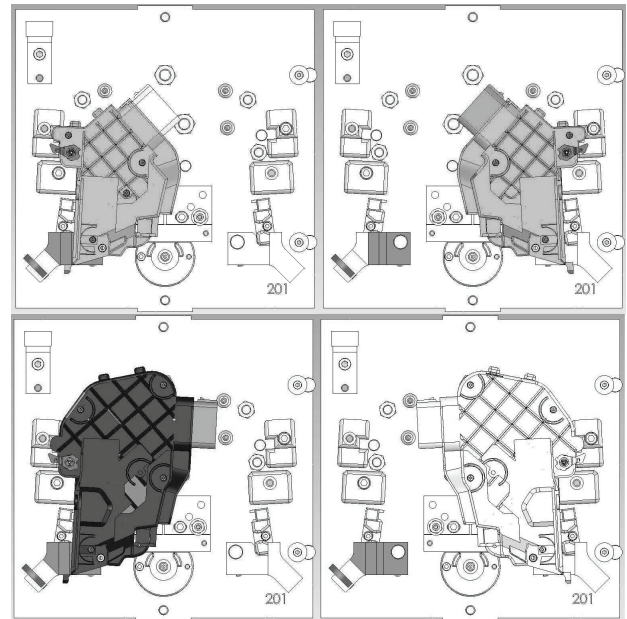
The arrangement of the *client* pieces on the assembling plate.
